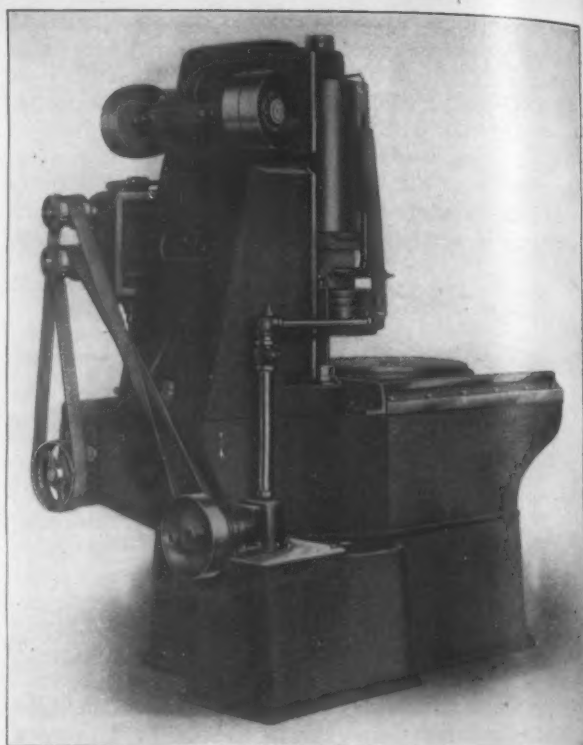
Rear View of the Grinder, Showing Pump and Water Supply Pipe.
